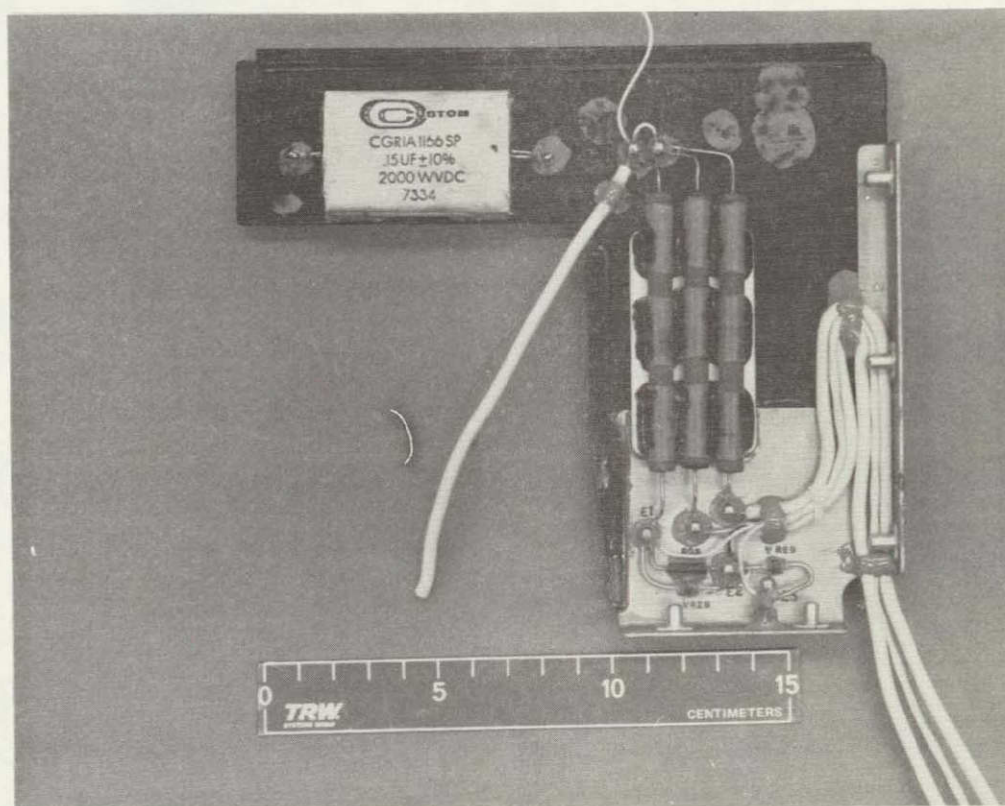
Typical High Voltage Circuit Board Prior to Final Assembly
